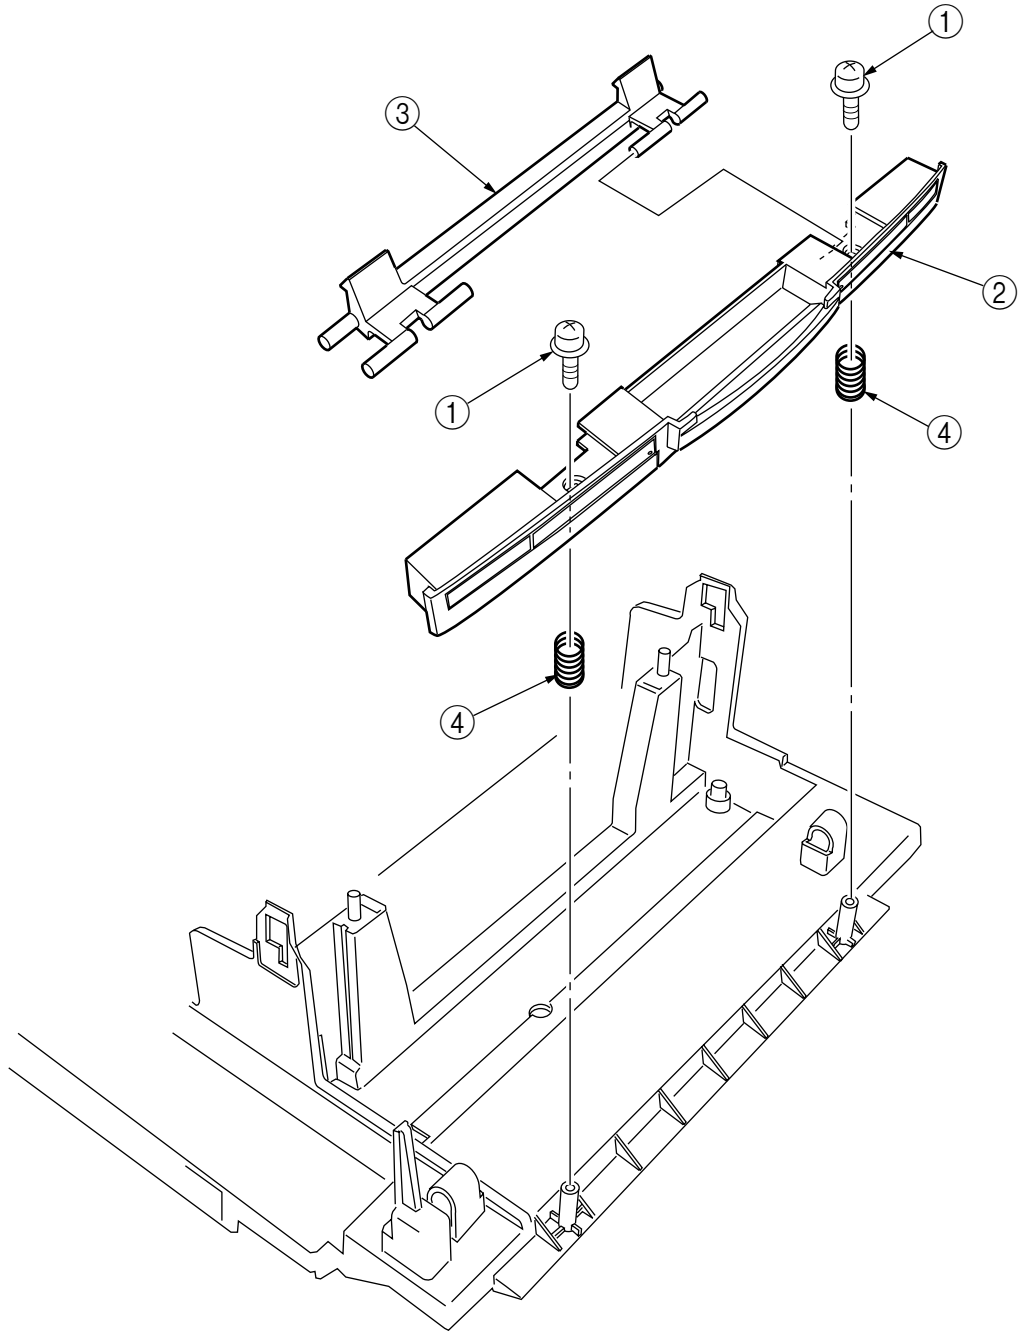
Top Cover Handle/ Tope Cover Latch/ Top Cover Latch Spring
